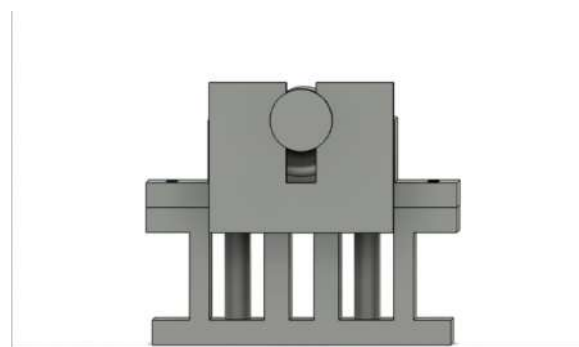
Conical Clutch Design Lock Elevation View (Closed Configuration)
